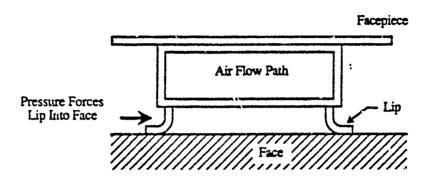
INHALATION CHECK VALVE DUCT: LIP-SEAL DESIGN
